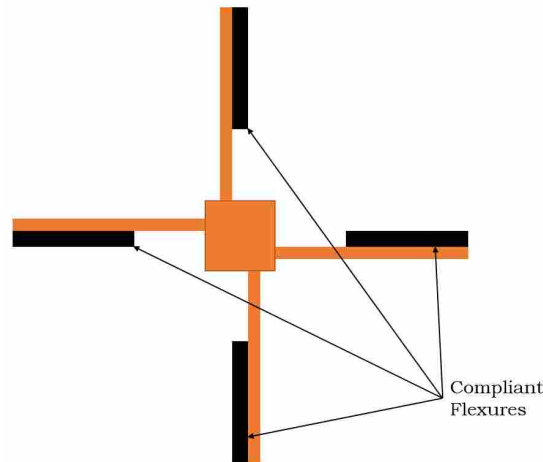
Concept of OCRJ cross section showing a way to engage the compliant flexures while avoiding binding issues.
